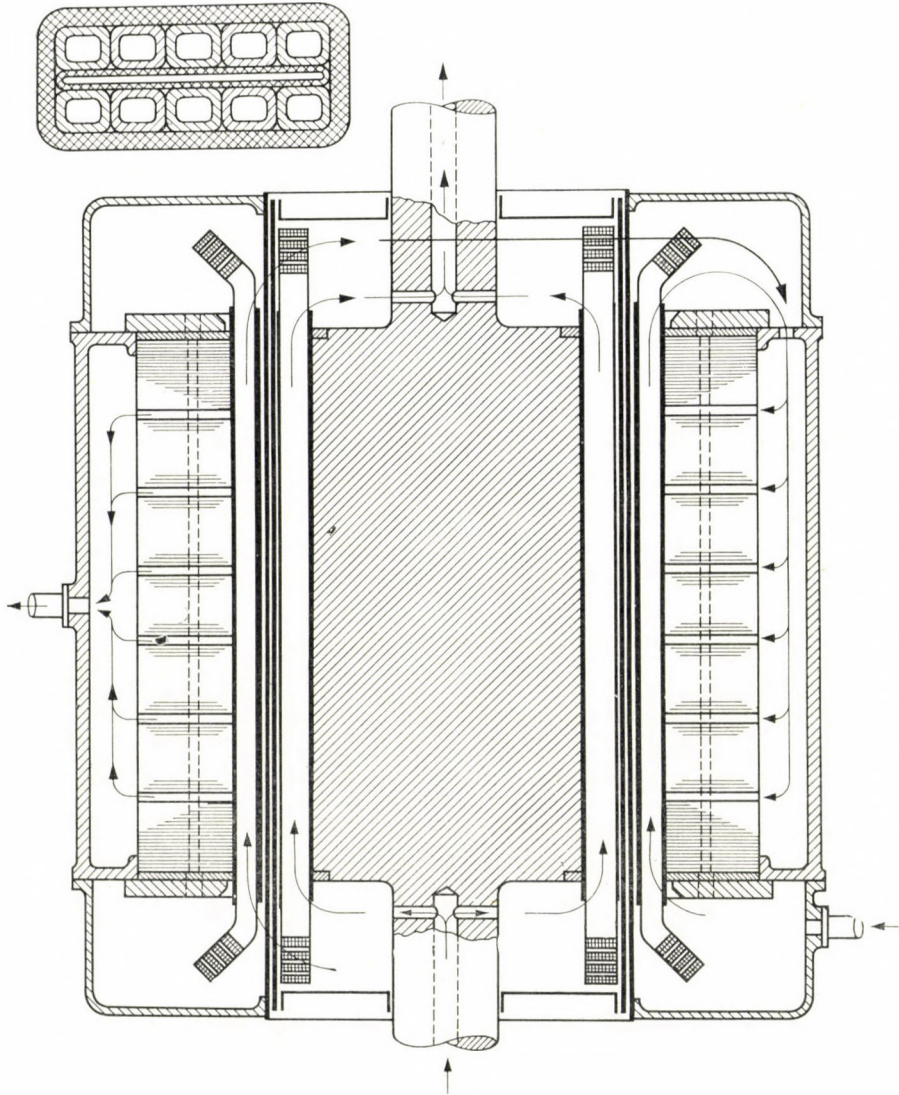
Liquid-cooled rotor and stator arrangement, 1917
